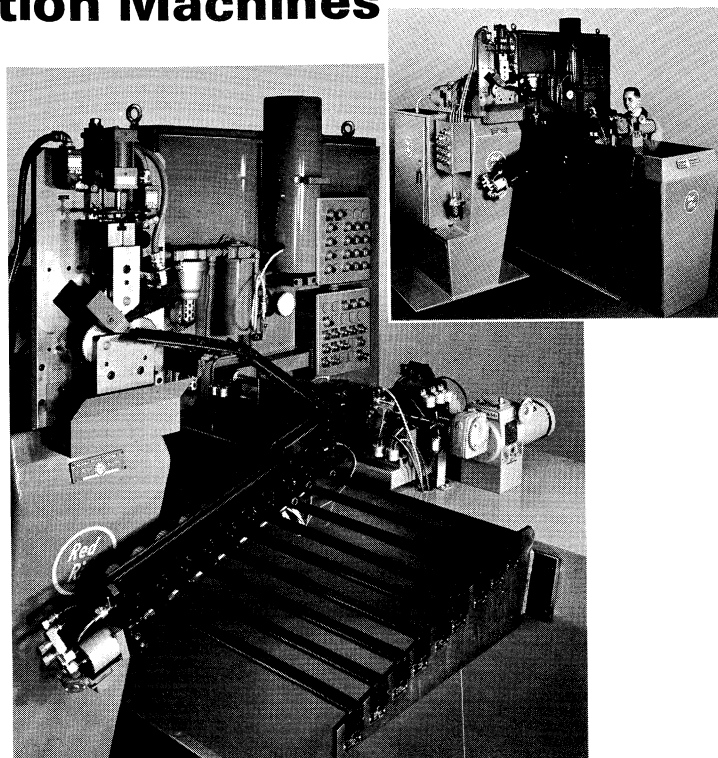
A Red Ring automatic gear gaging center that burnishes transmission pinions, checks them for eight variables and sorts rejects into nine categories at a 400-per-hour rate.
